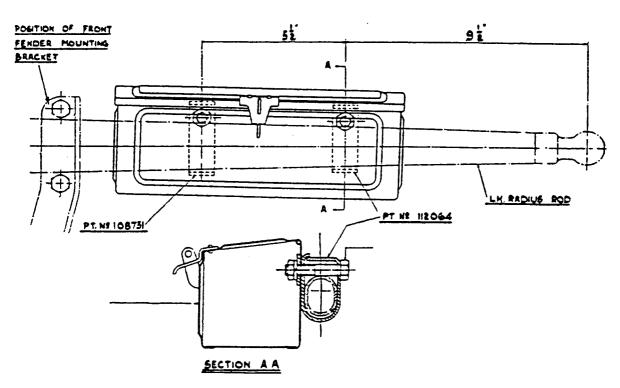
TOOL BOX REPOSITIONING TO ACCOMMODATE FRONT WHEEL FENDERS — DIESEL ENGINE TRACTORS.
